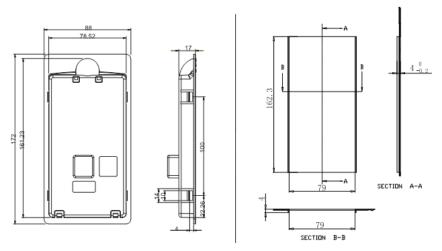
Keyboard tray size (left) and keyboard hole size (right)
